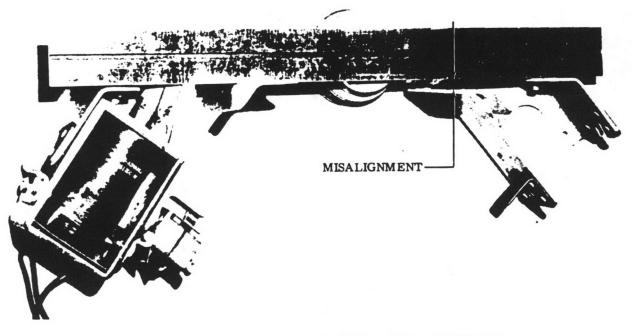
Checking Alignment of Solenoid Bracket Flanges
